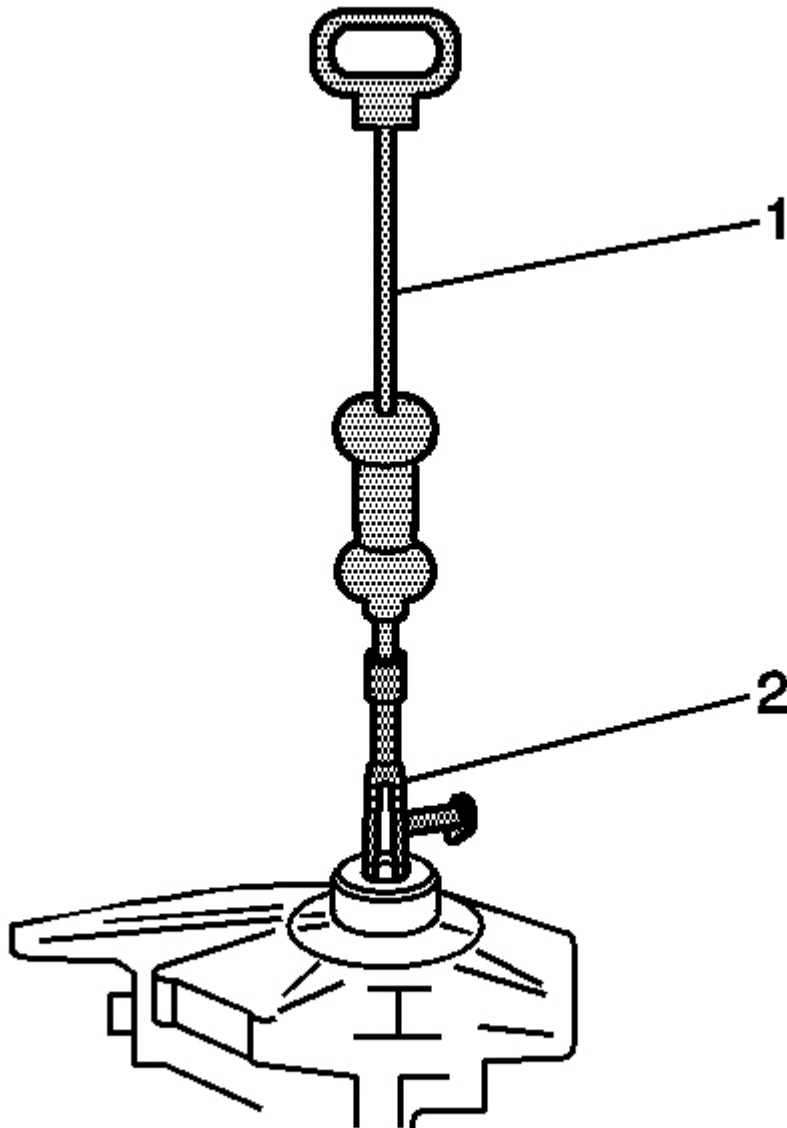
Identifying Special Tools J 29369-1 & J 2619-01
